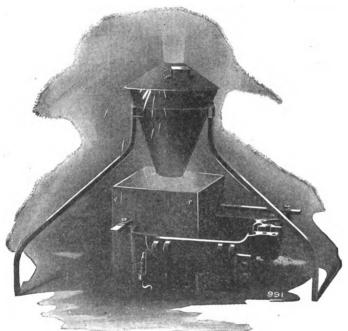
Thermit Crucible Pouring Charge into Mold Courtesy of Goldschmidt Thermit Company
